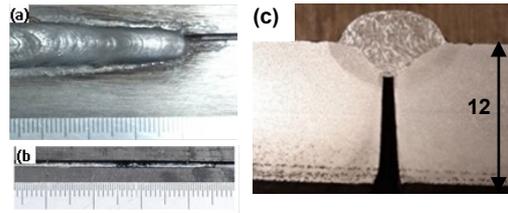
Weld bead and cross section of GMAW welding. (a) Top surface; (b) Bottom surface and (c) Cross section.
